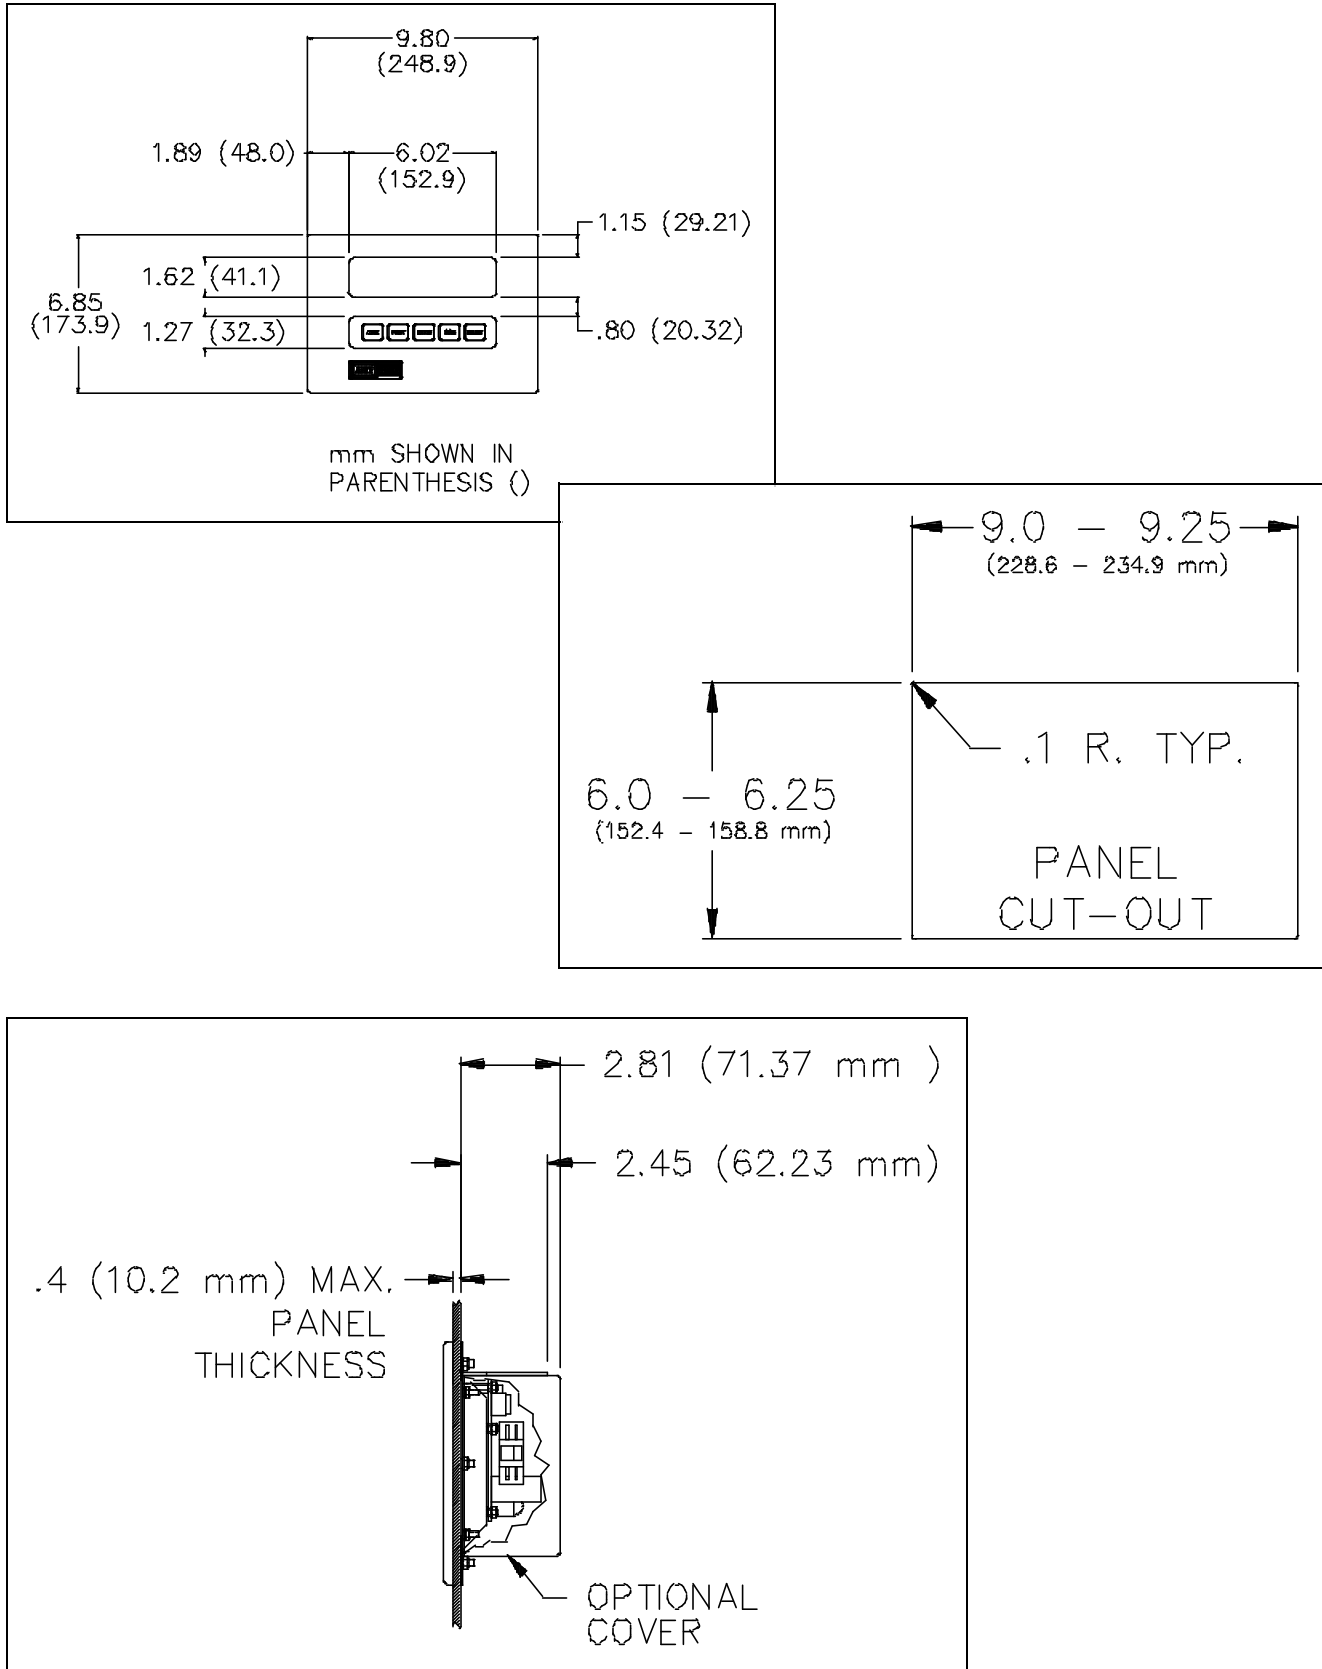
Model 455 indicator mounting holes and overall dimensions
